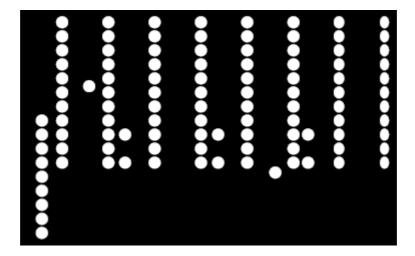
Photograph of PCB solder joints suppressing the traces
